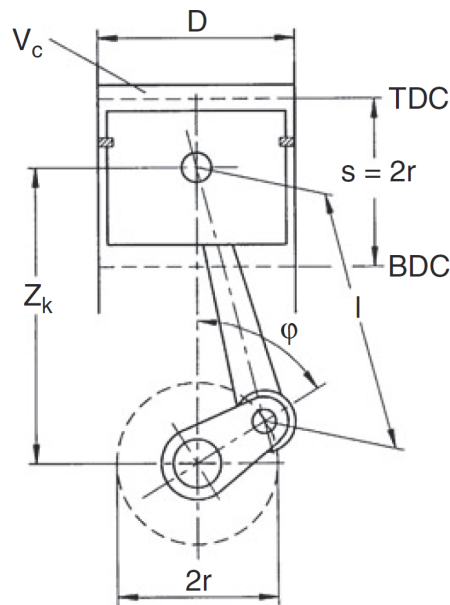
Crank Assembly of Internal Combustion Engine [1]
